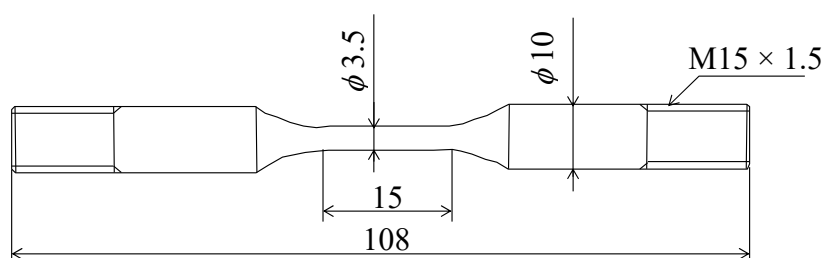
Shape and dimensions of tensile specimen of SUJ2 (unit in mm).
